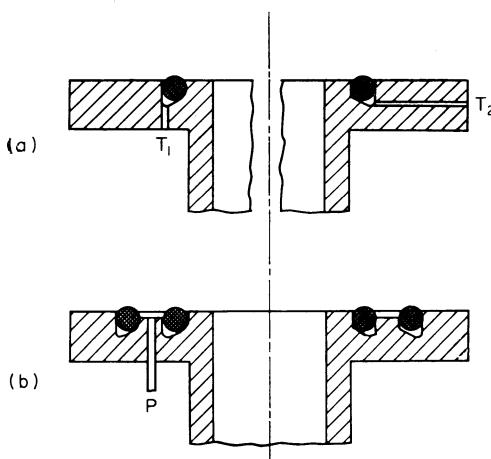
Flanges with O-ring seals in trapezium grooves. (a) single O-ring; *T*₁ and *T*₂, axial and radial pumpout ducts for evacuating the trapped volume; (b) double groove seal with guard vacuum; *P* = pumpout duct
